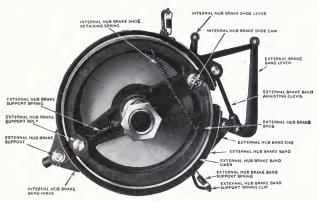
Internal and External Brake System of Peerless Car, Showing Details Connected with Operation. Peerless Motor Car Company. Cleveland, Ohio.
